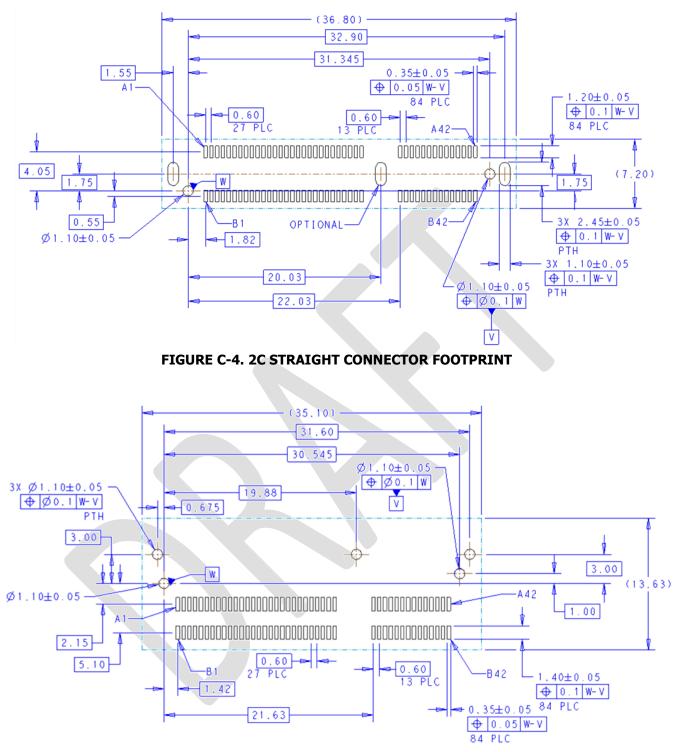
2C RIGHT ANGLE CONNECTOR FOOTPRINT
